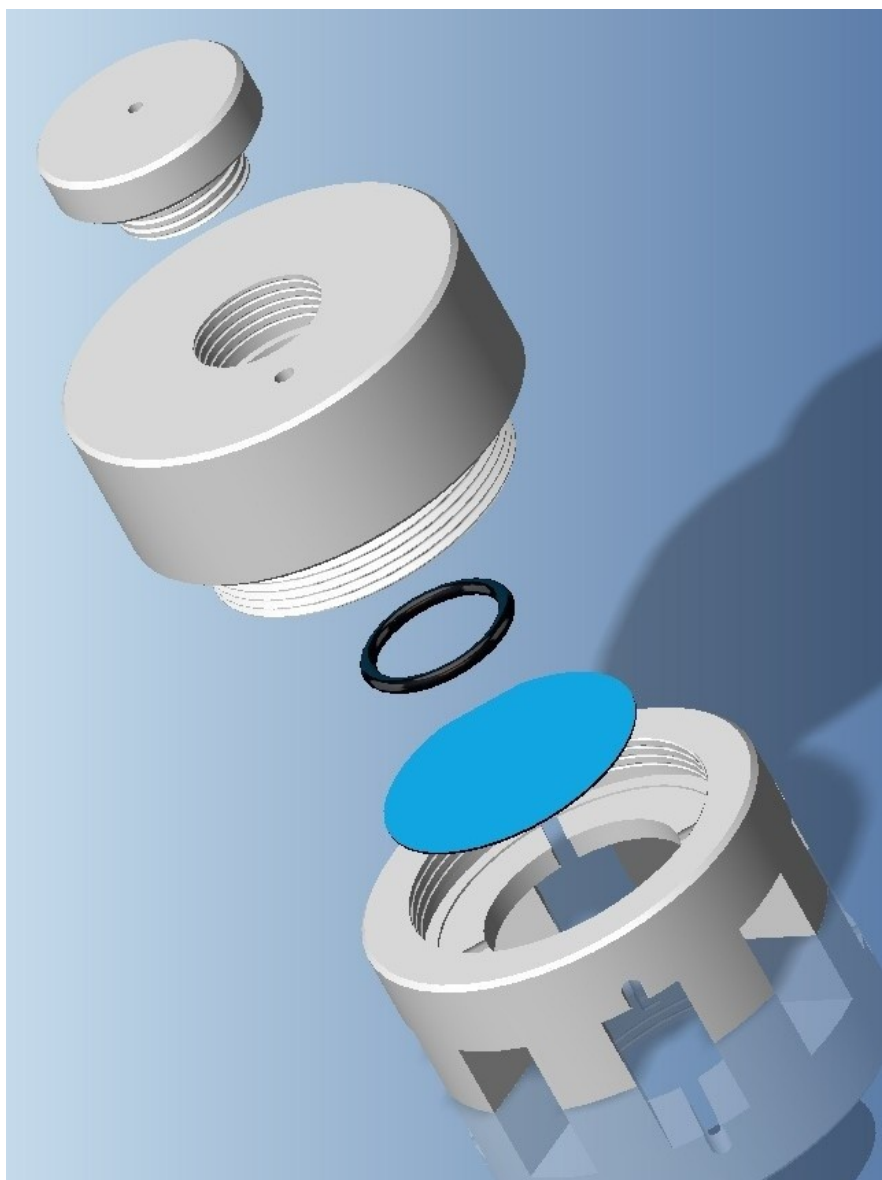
Exploded view of the 3D model of the reactor
